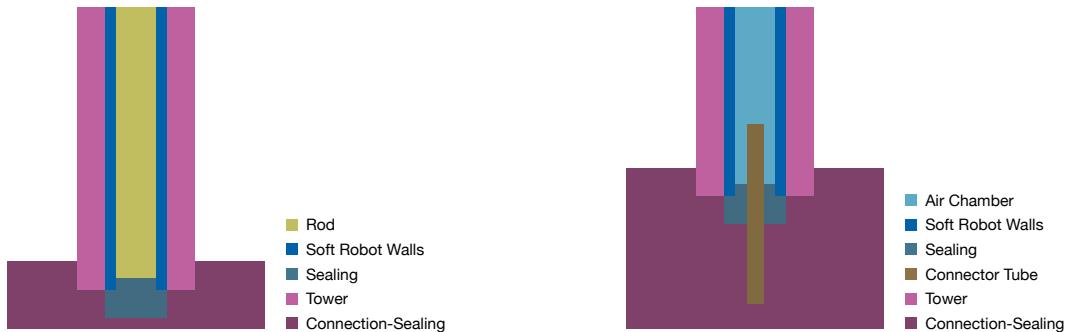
The soft robot’s end is sealed by placing it inside the tower, then inserting it into the silicone filled *end-sealing* mold (*left*) or into the *connection-sealing* mold (*right*).
